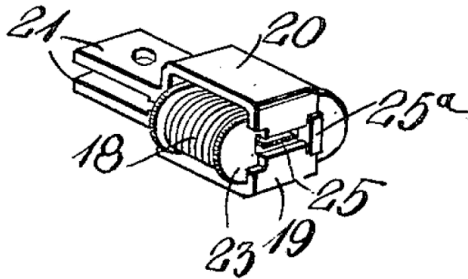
Baldwin's patent drawing of the coil assembly in his receiver.
